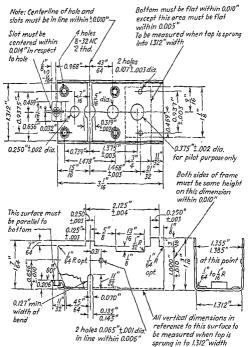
Part print of housing frame. (White-Rodgers Electric Co.)
